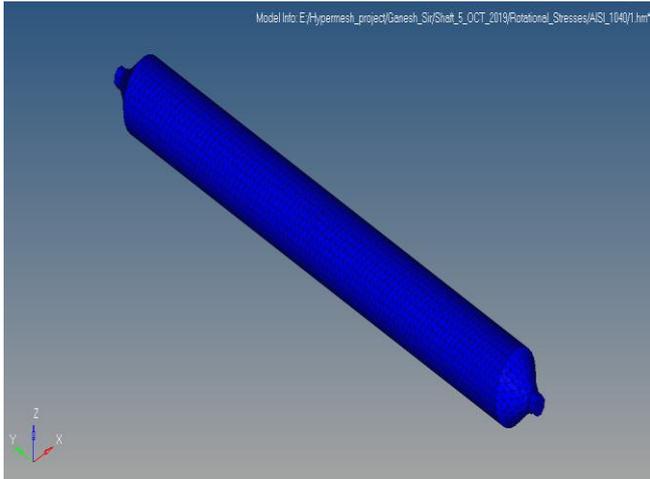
shows the three dimensional model of pad steam machine roller shaft create in CATIA V5R software with significant dimension.
